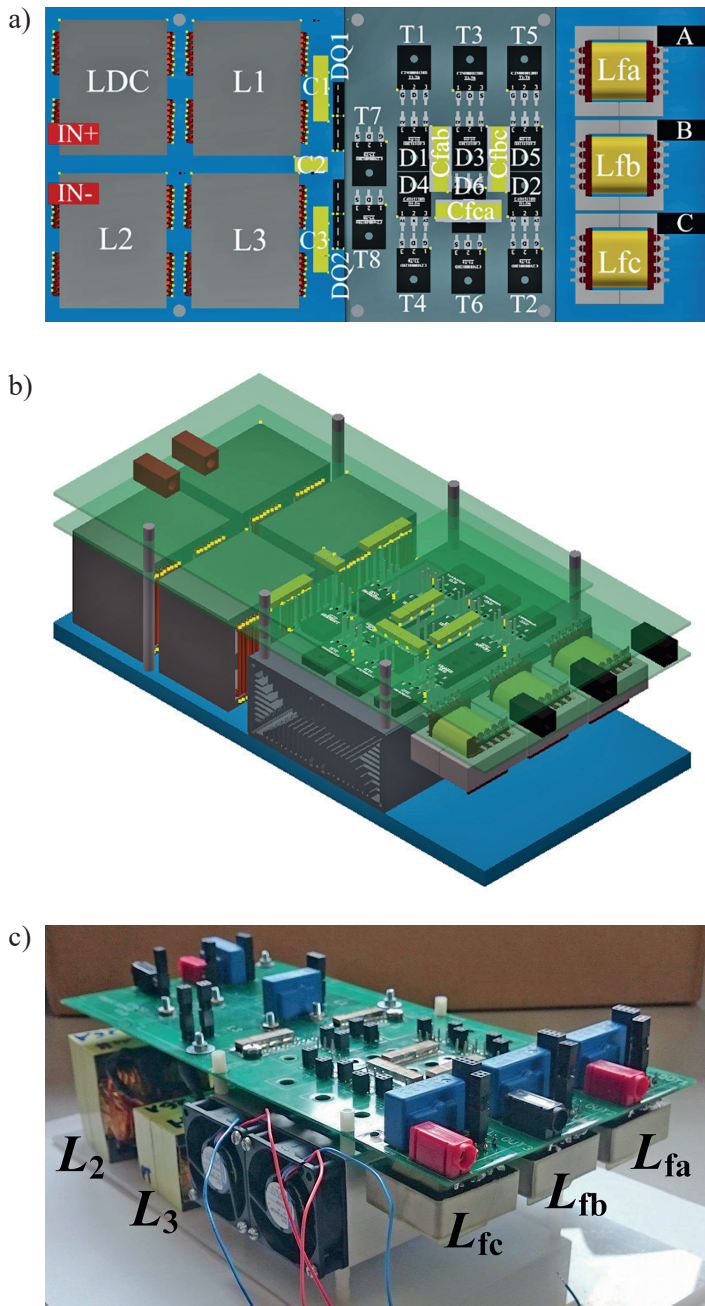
Power board components placement (a), the 3D model view (b) and complete power stage view (c) of the built iCFqZSI 6 kVA prototype
